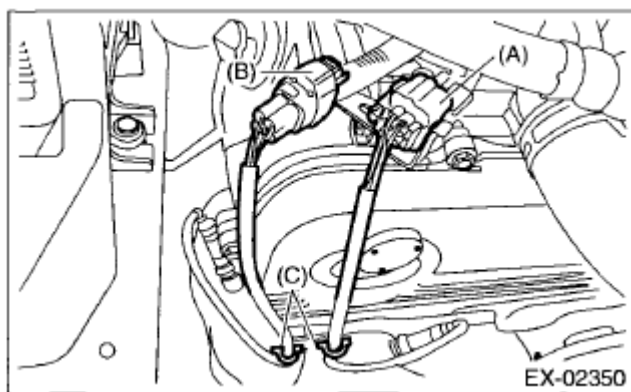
Identifying Front Oxygen (A/F) Sensor Connector And Rear Oxygen Sensor Connector With Clip
